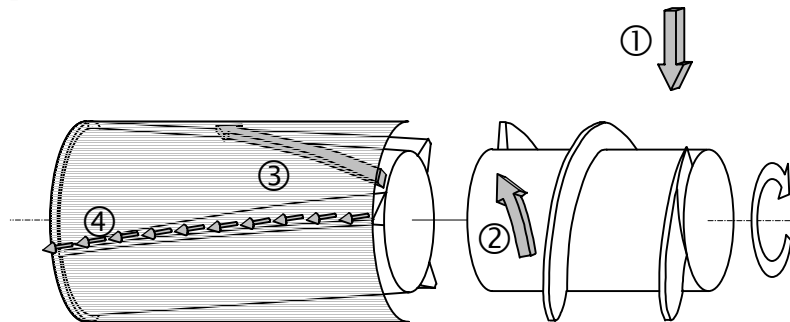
Exploded drawing of one half of a twin-screw radial screen extruder
